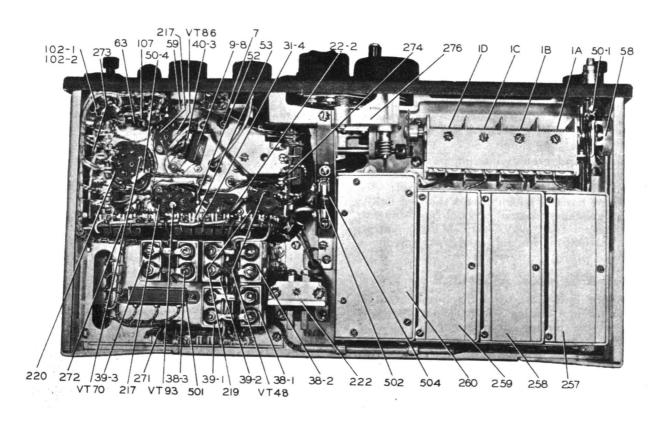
Radio Receiver BC-348-B: Bottom View of Chassis
